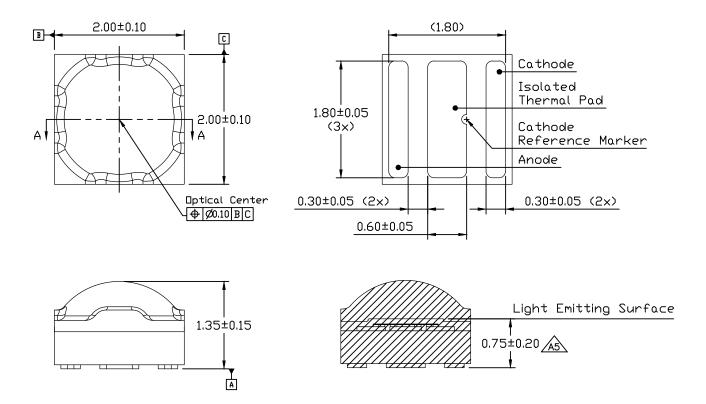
Mechanical dimensions for LUXEON C Color Line.
